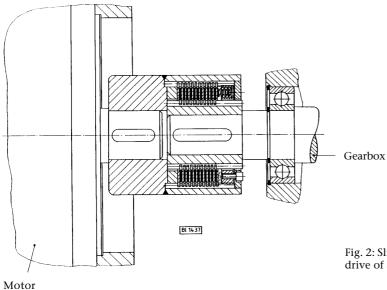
Slipping clutch, series 0600-474, fitted in the feed drive of a boring and milling machine.
